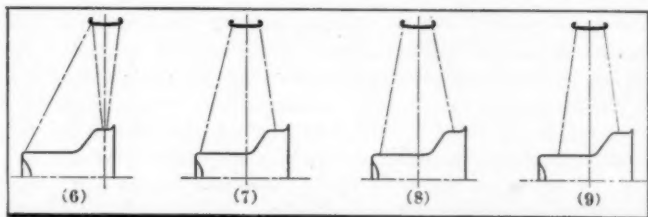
Cross sections showing the various designs of wire-wheel construction tested
